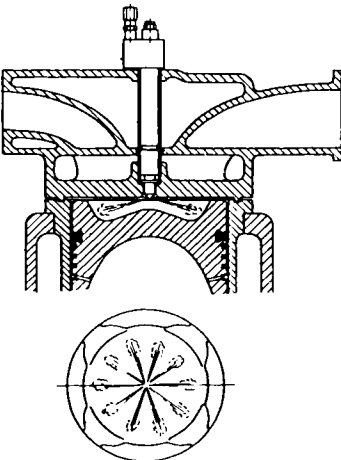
The quiescent combustion chamber of a larger diesel engine
